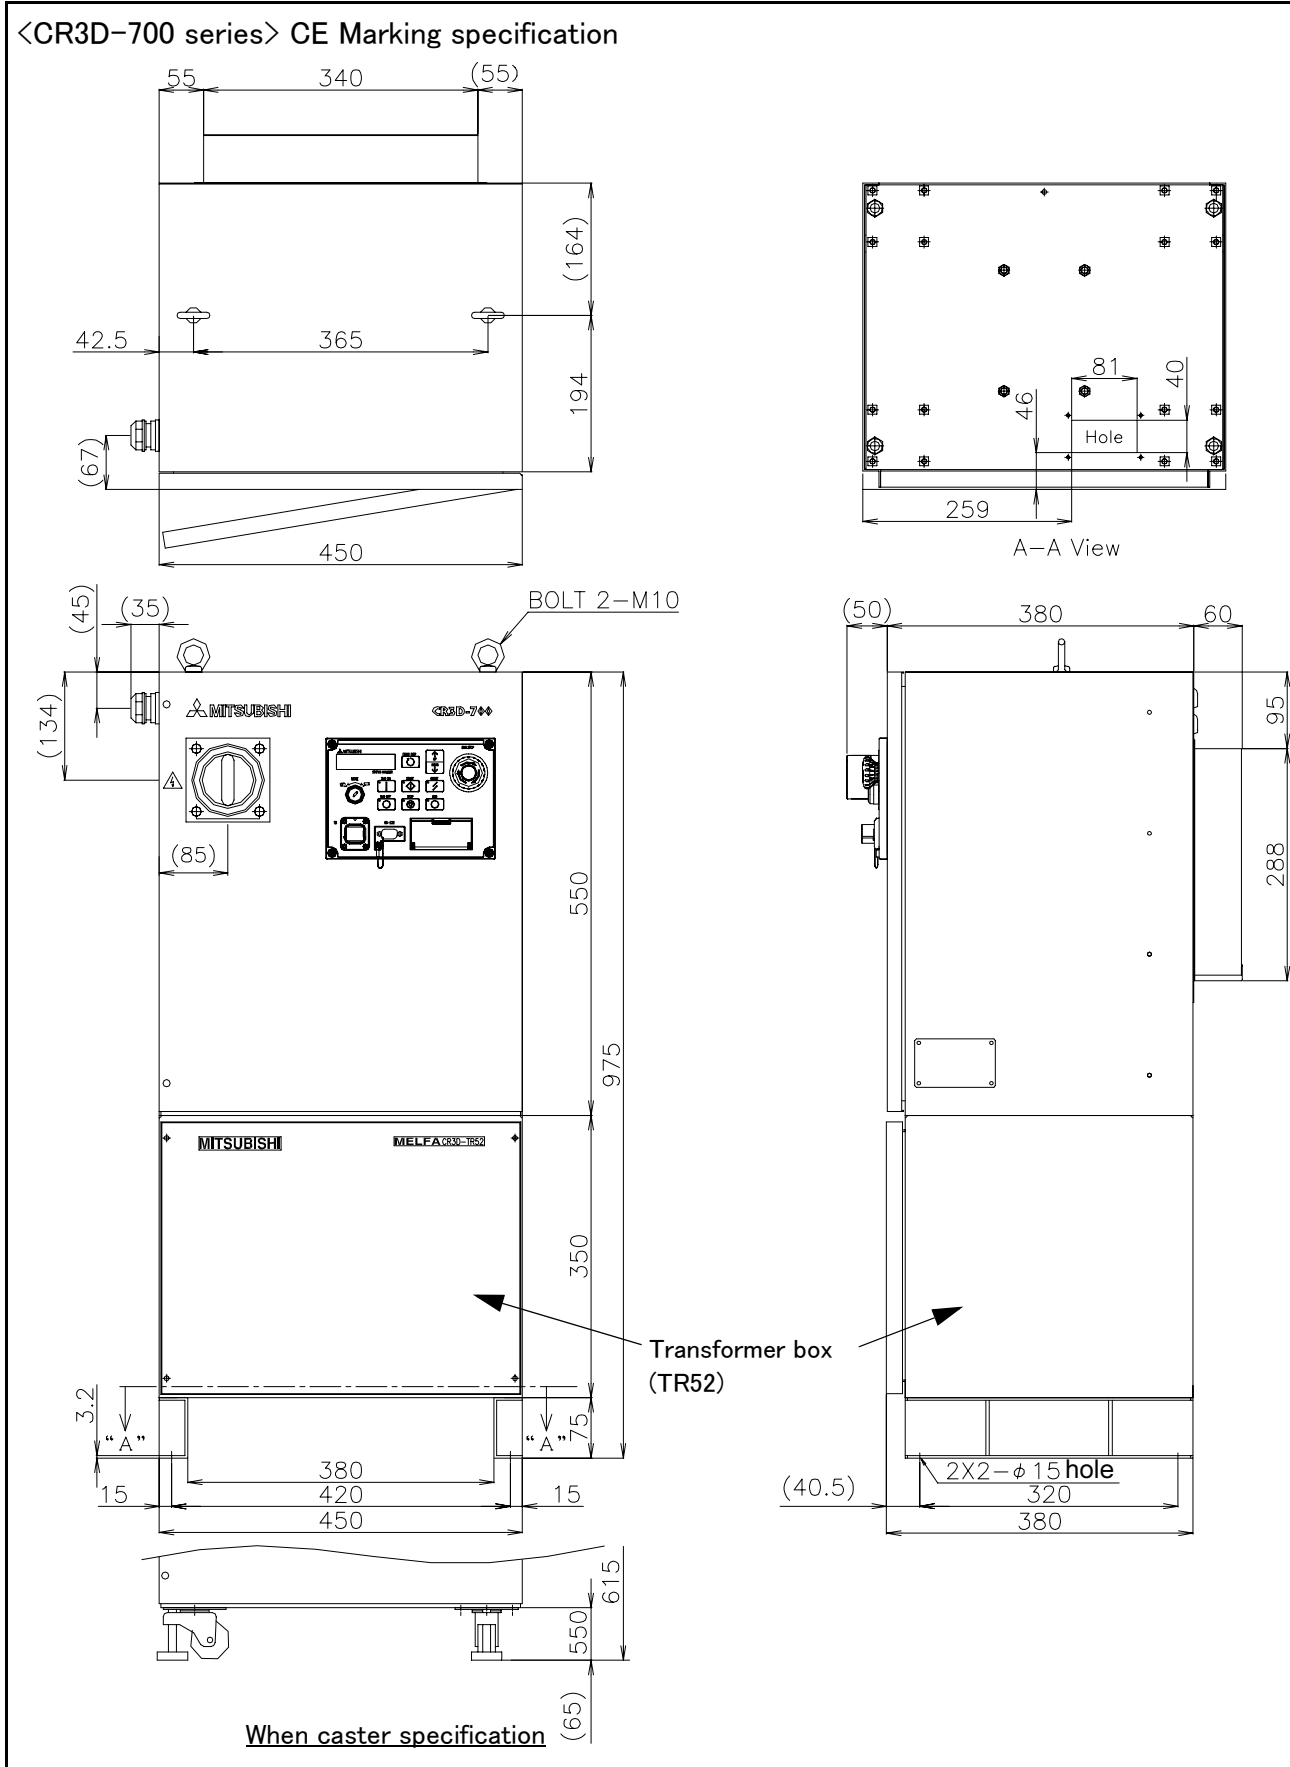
Outside dimensions of controller(CR3D-700 CE Marking)
